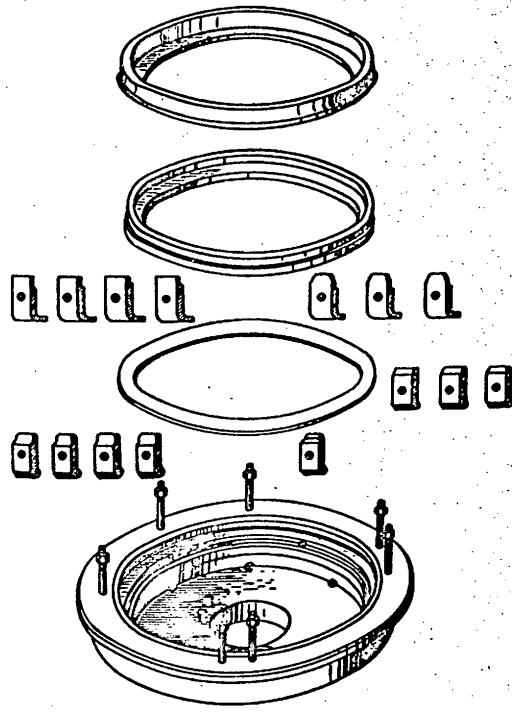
FIXTURE FOR SETTING CAM RING WITH EXPANDING BUSHINGS
